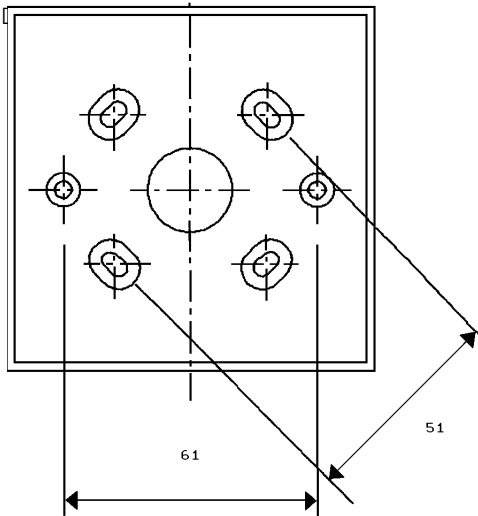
FC420CP-I Fixing Dimensions Surface Mount Backbox
